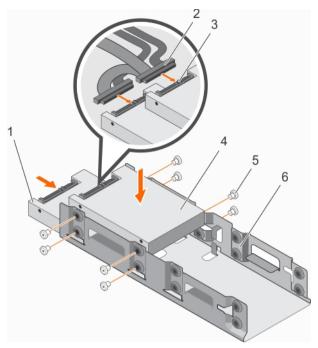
Installing a 2.5 inch cabled hard drive (hard drive 0/E and hard drive 1/F) from the hard drive cage
